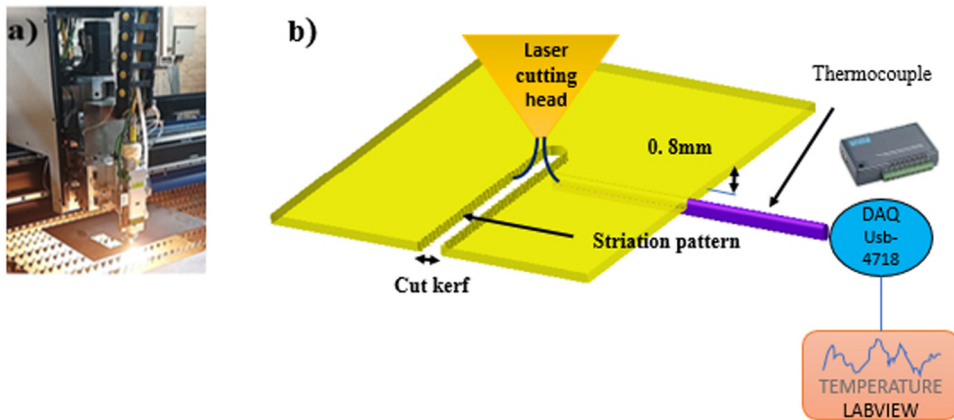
Laser cutting experimental setup: (a) Actual view; (b) schematic vision.
